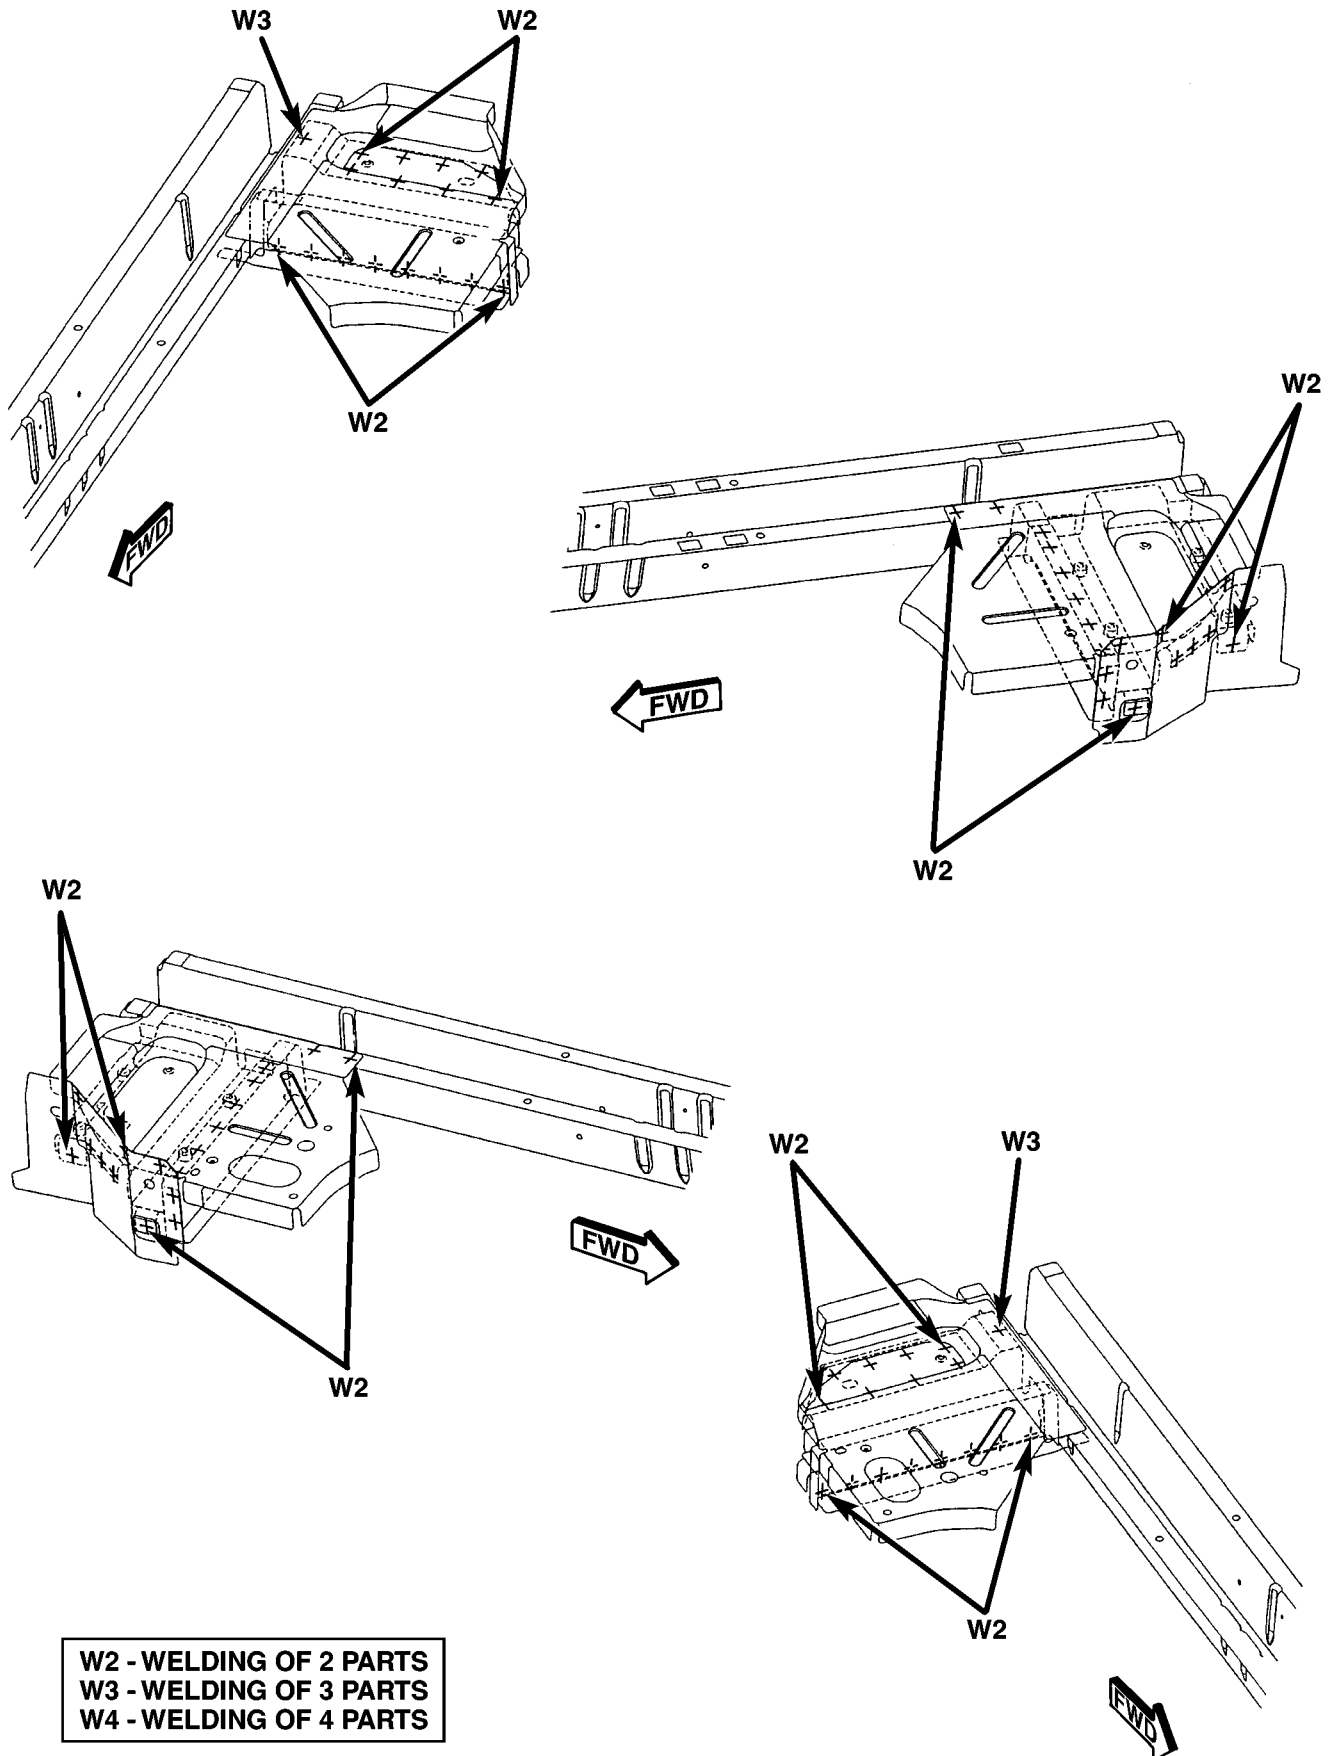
REAR SUSPENSION HANGER BRACKETS - LONG WHEEL BASE
